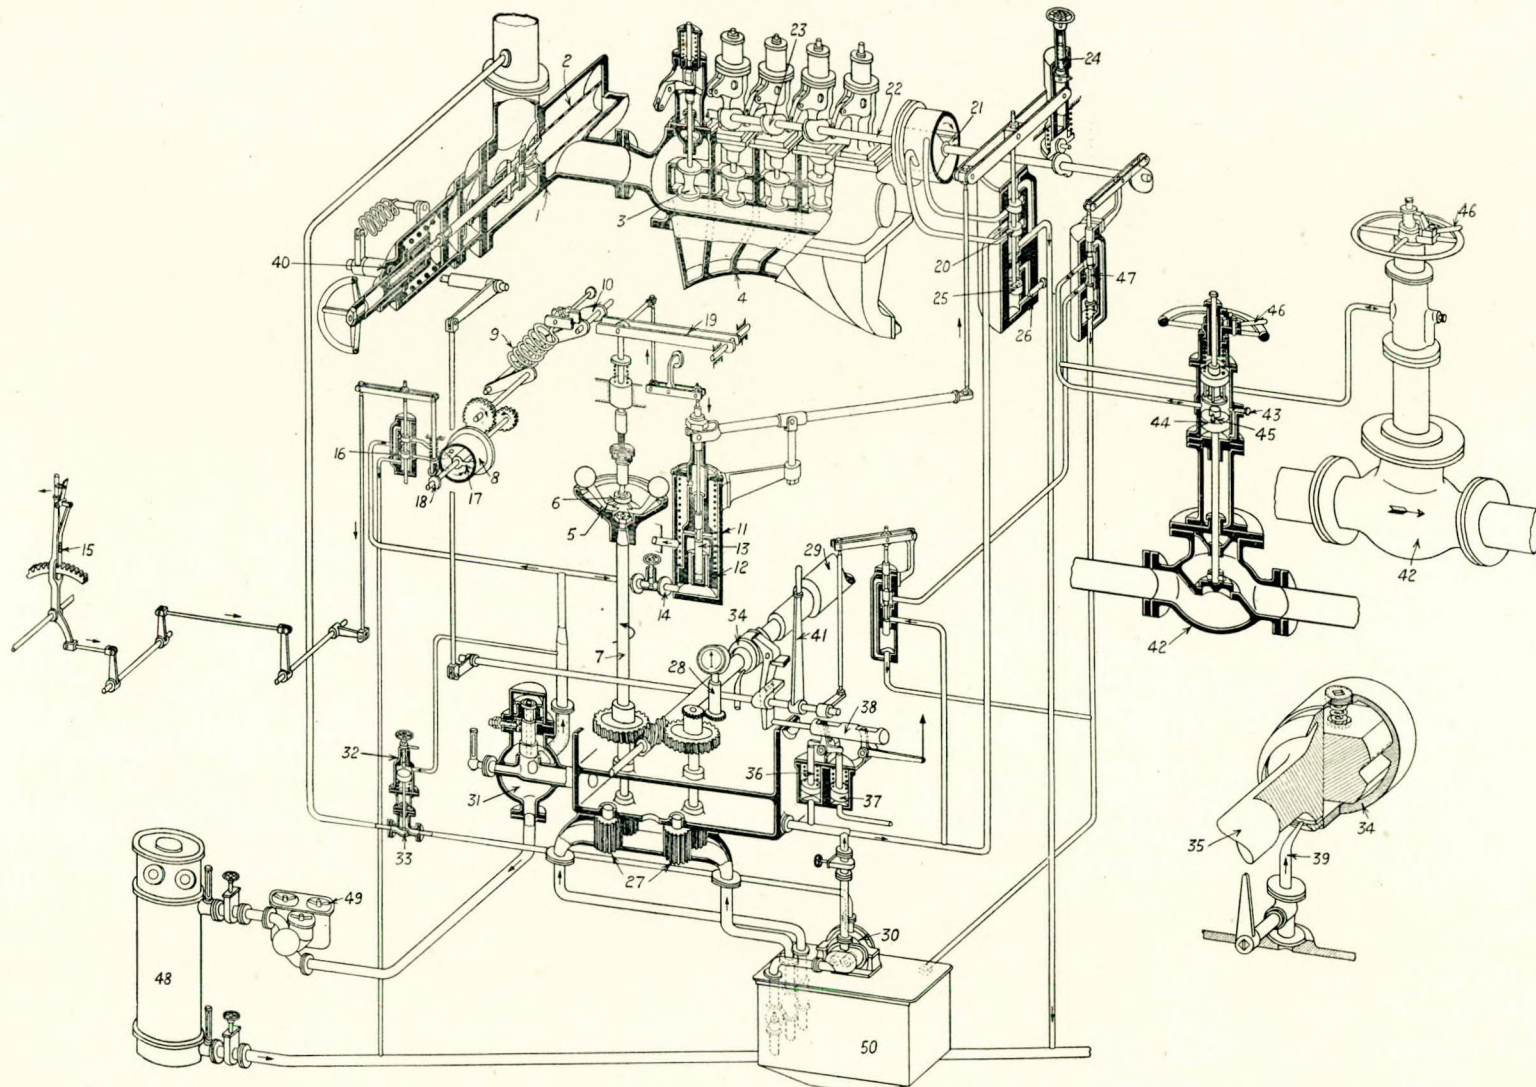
Diagrammatic view of main-turbine governing gear.
